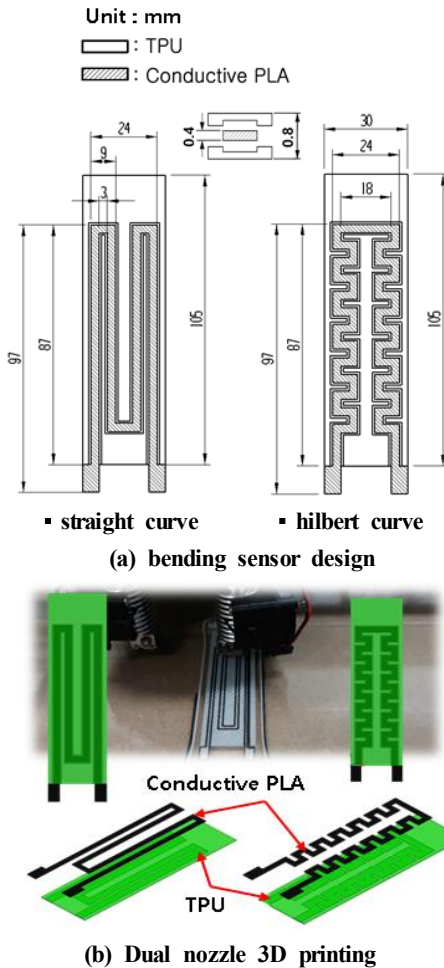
Design and Fabrication of 3D printing flexible bending sensor
